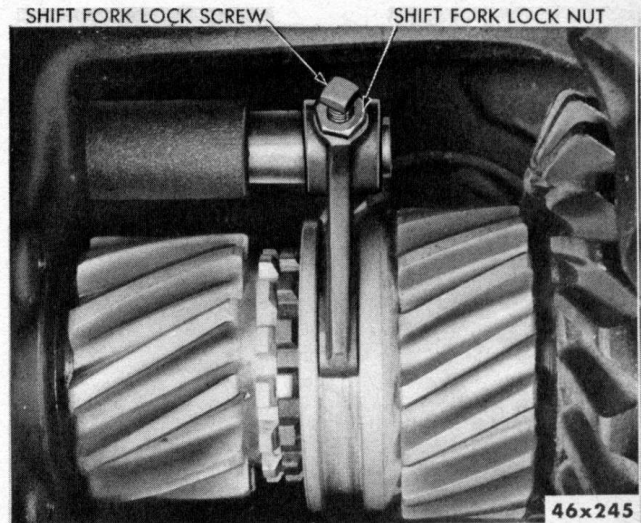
Assembled View of Cross Shaft and Shift Fork
